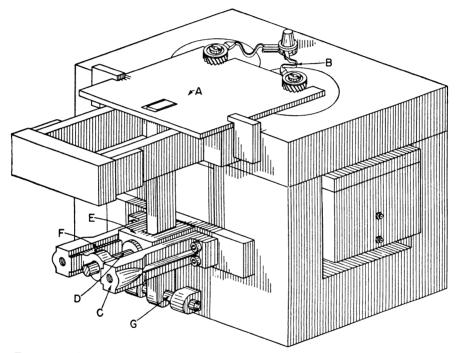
Same die as shown in Fig. 2.17a, in the ejection position. The casting is on top.
